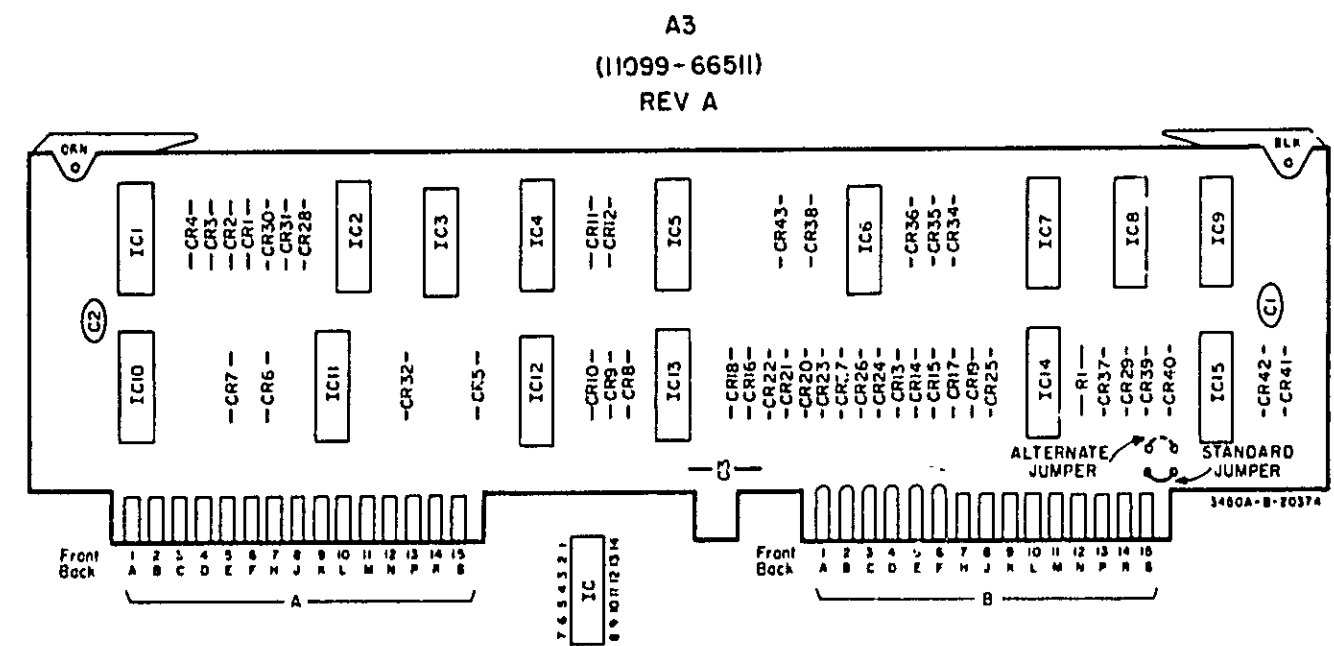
Remote Control Assembly (A3). 7-17/7-18
